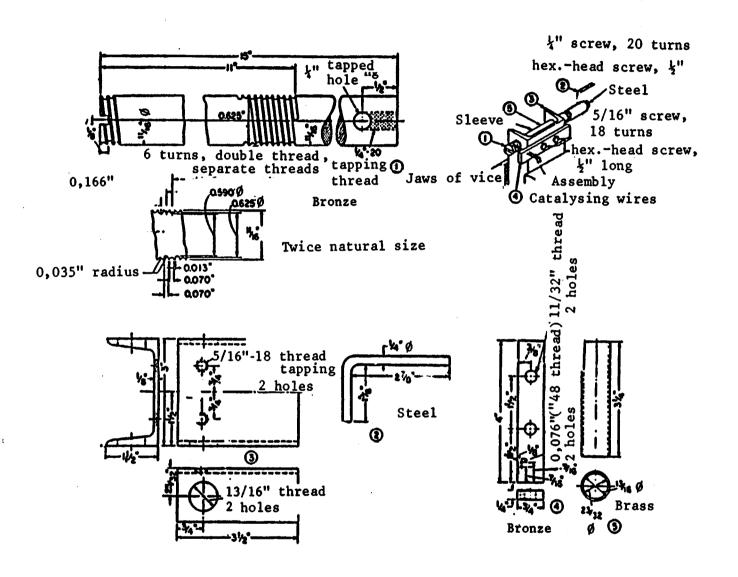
SPINDLE FOR WINDING CATALYSING COILS
